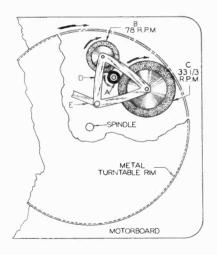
The small rubber-tired wheel A is on the motor shafts and drives both B and C at the same time. Either one of these engages and so drives the turntable at the speeds indicated.
